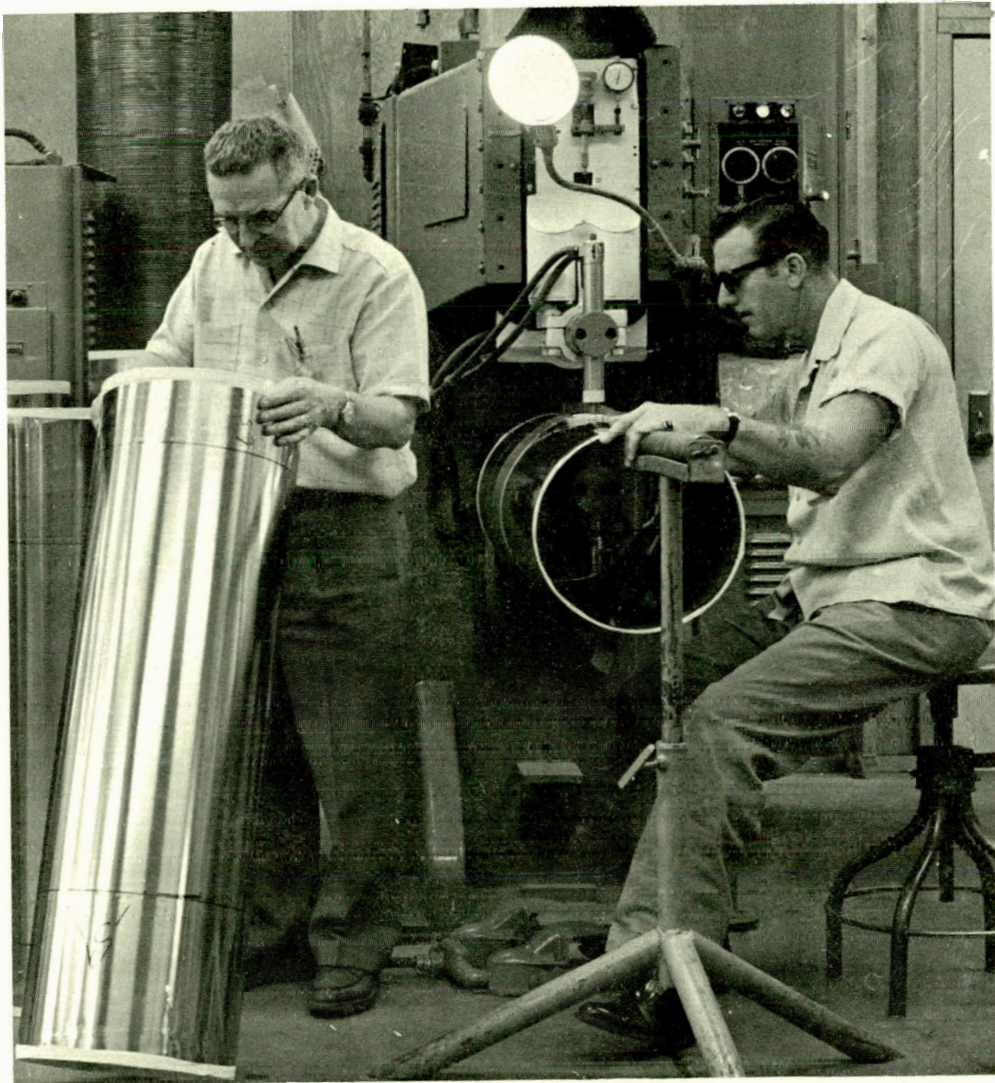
RESISTANCE SPOT WELDING A NEW AM-355 CASE
